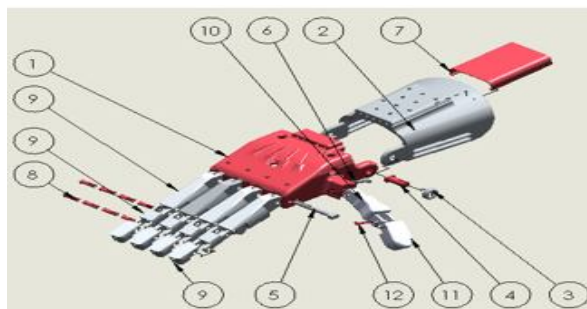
Prortype (Three-Segment Finger)Exploded View
